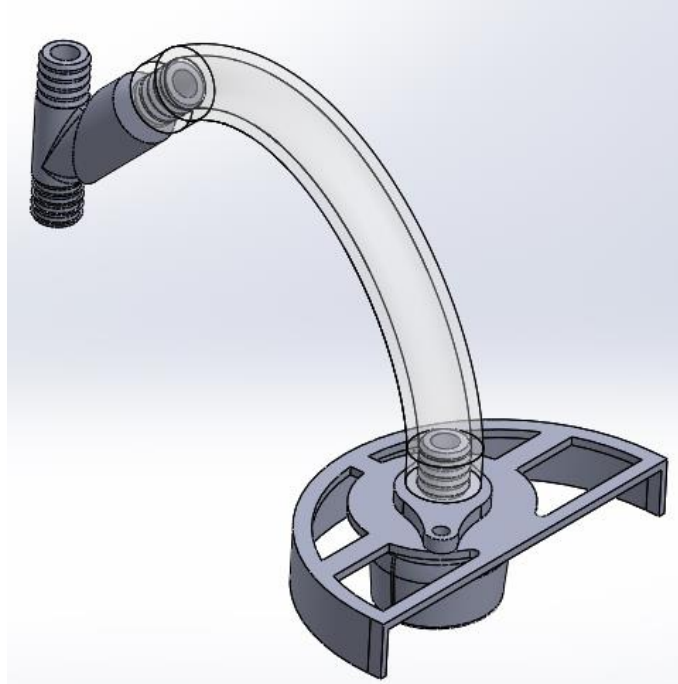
Humidifier Cap with the Connected Hose and Fittings (Isometric View)
